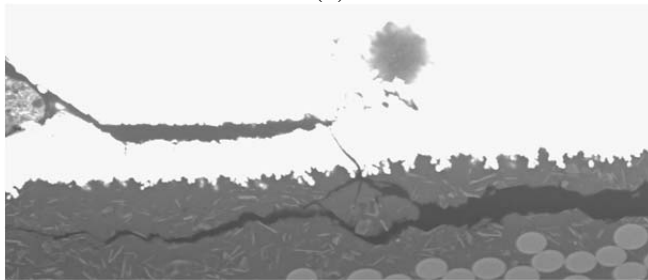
shows a different joint with a similar laminate crack emanating from the outer side of the joint and propagating under the pad. It has not yet propagated through the joint to produce a failure. A second BGA failure mode also observed: a combination IMC/solder failure. A complete through crack is seen to propagate in the solder as well as along the interfacial IMC. Since this IMC/solder crack has fully transected the joint, the direction of propagation is not obvious simply from this image.
